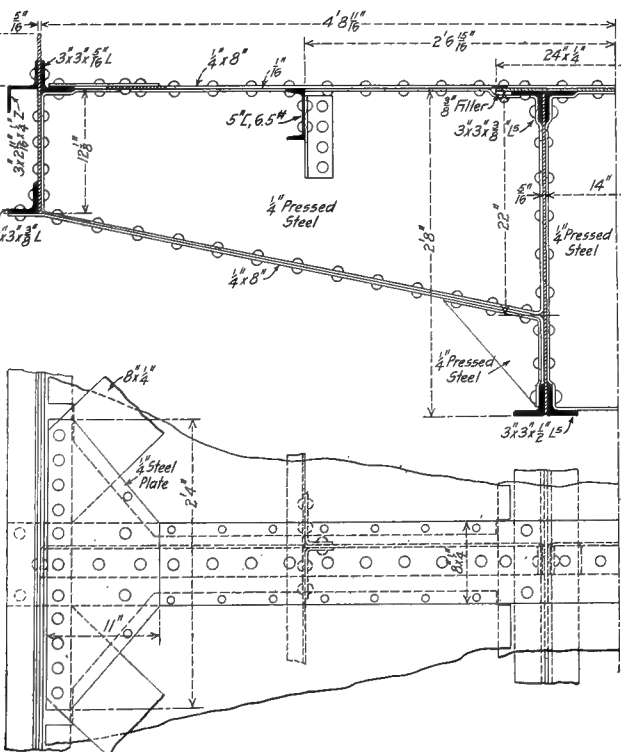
Center Crosstie of Atchison, Topeka & Santa Fe Steel Day Coach Shown in Figs. 379 and 380.
